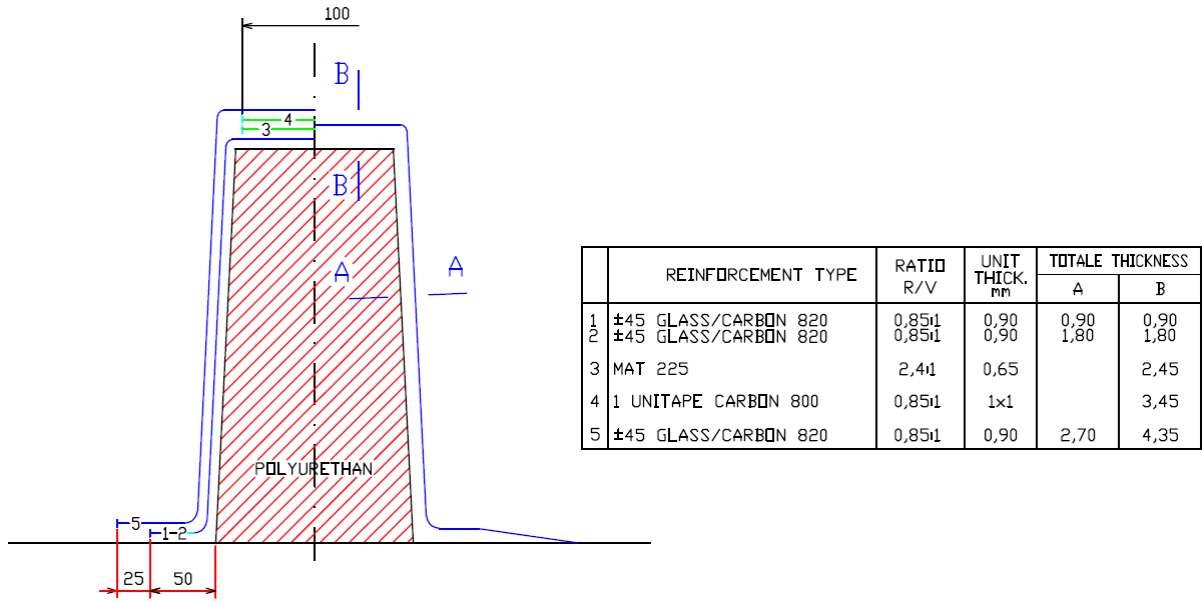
Typical reinforcement lamination scheme – TYPE 2 reinforcement
